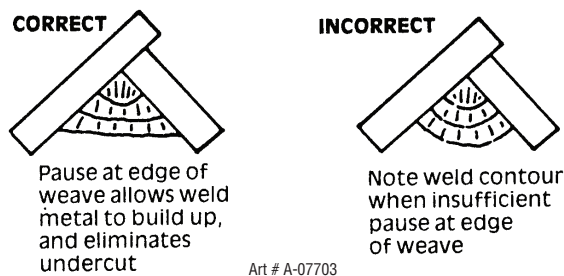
Examples of Vertical Fillet Welds
